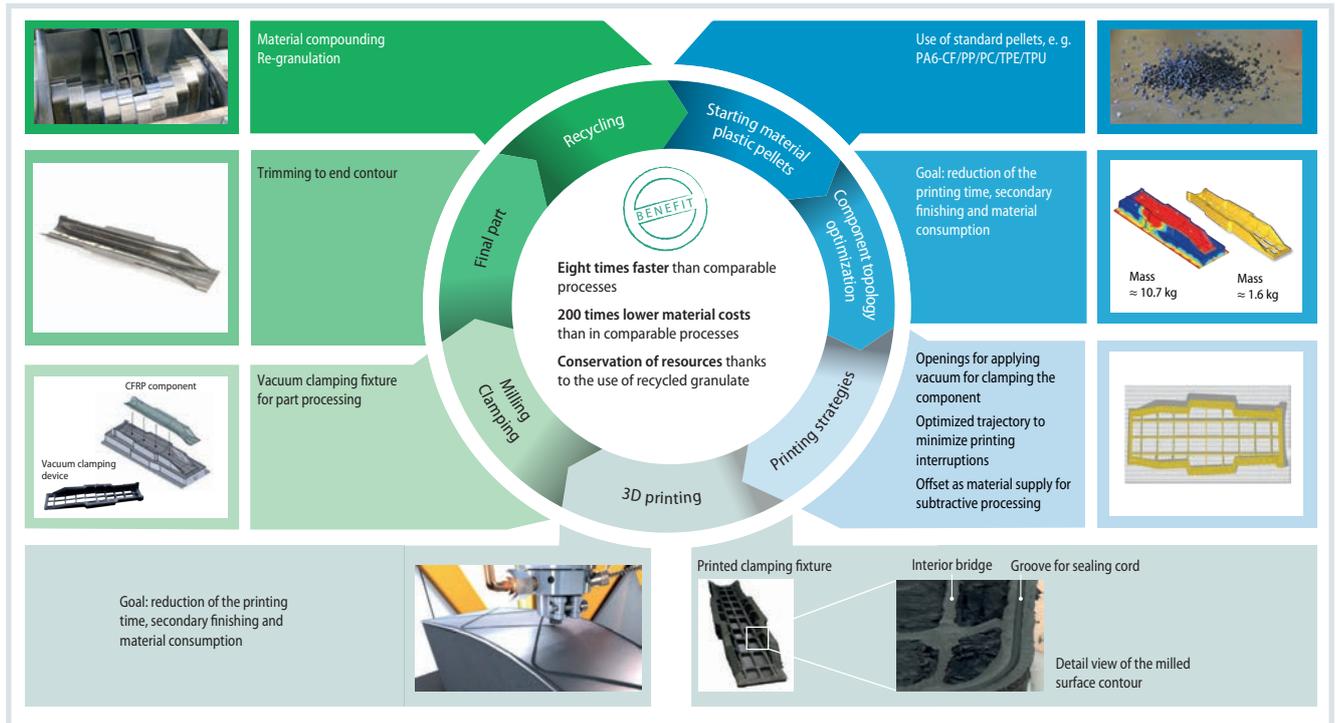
Closed-loop concept with the example of the vacuum clamping fixture (source: Fraunhofer IWU)
